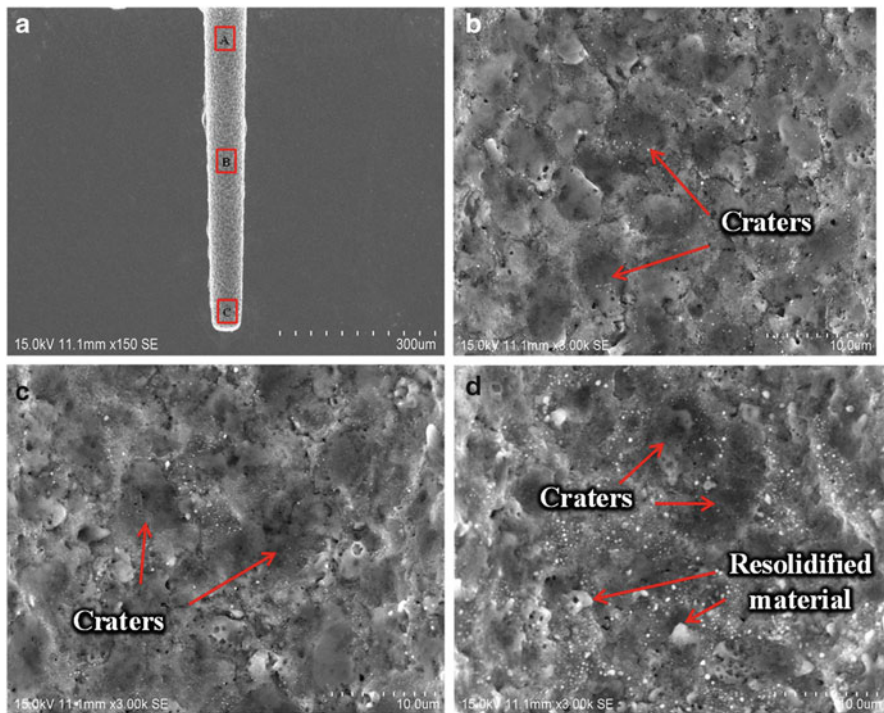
SEM micrographs of (a) cross section of micro hole, (b) machined surface at zone A, (c) machined surface at zone B, (d) machined surface at zone C
